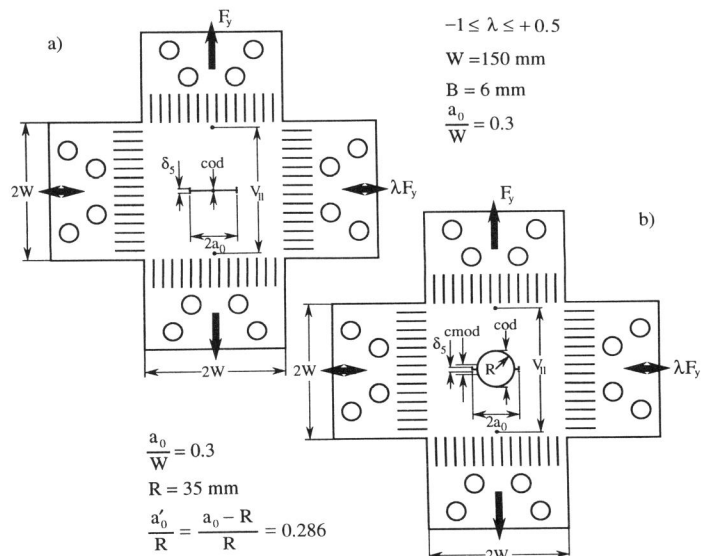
Through-thickness cracked a) and notched b) cruciform specimen
